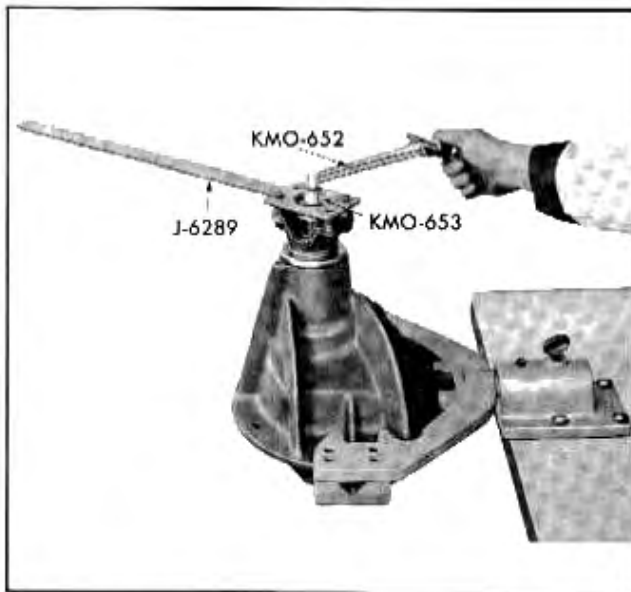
Checking Pinion Bearing Preload With Torque Wrench KMO-652
